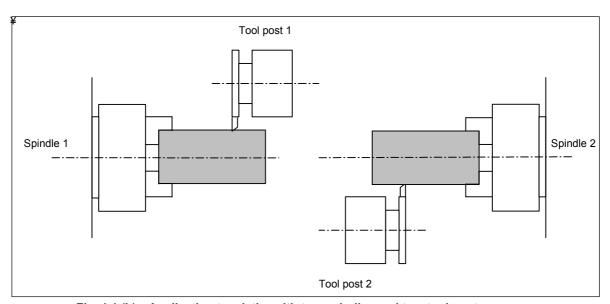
(b) Application to a lathe with two spindles and two tool posts
